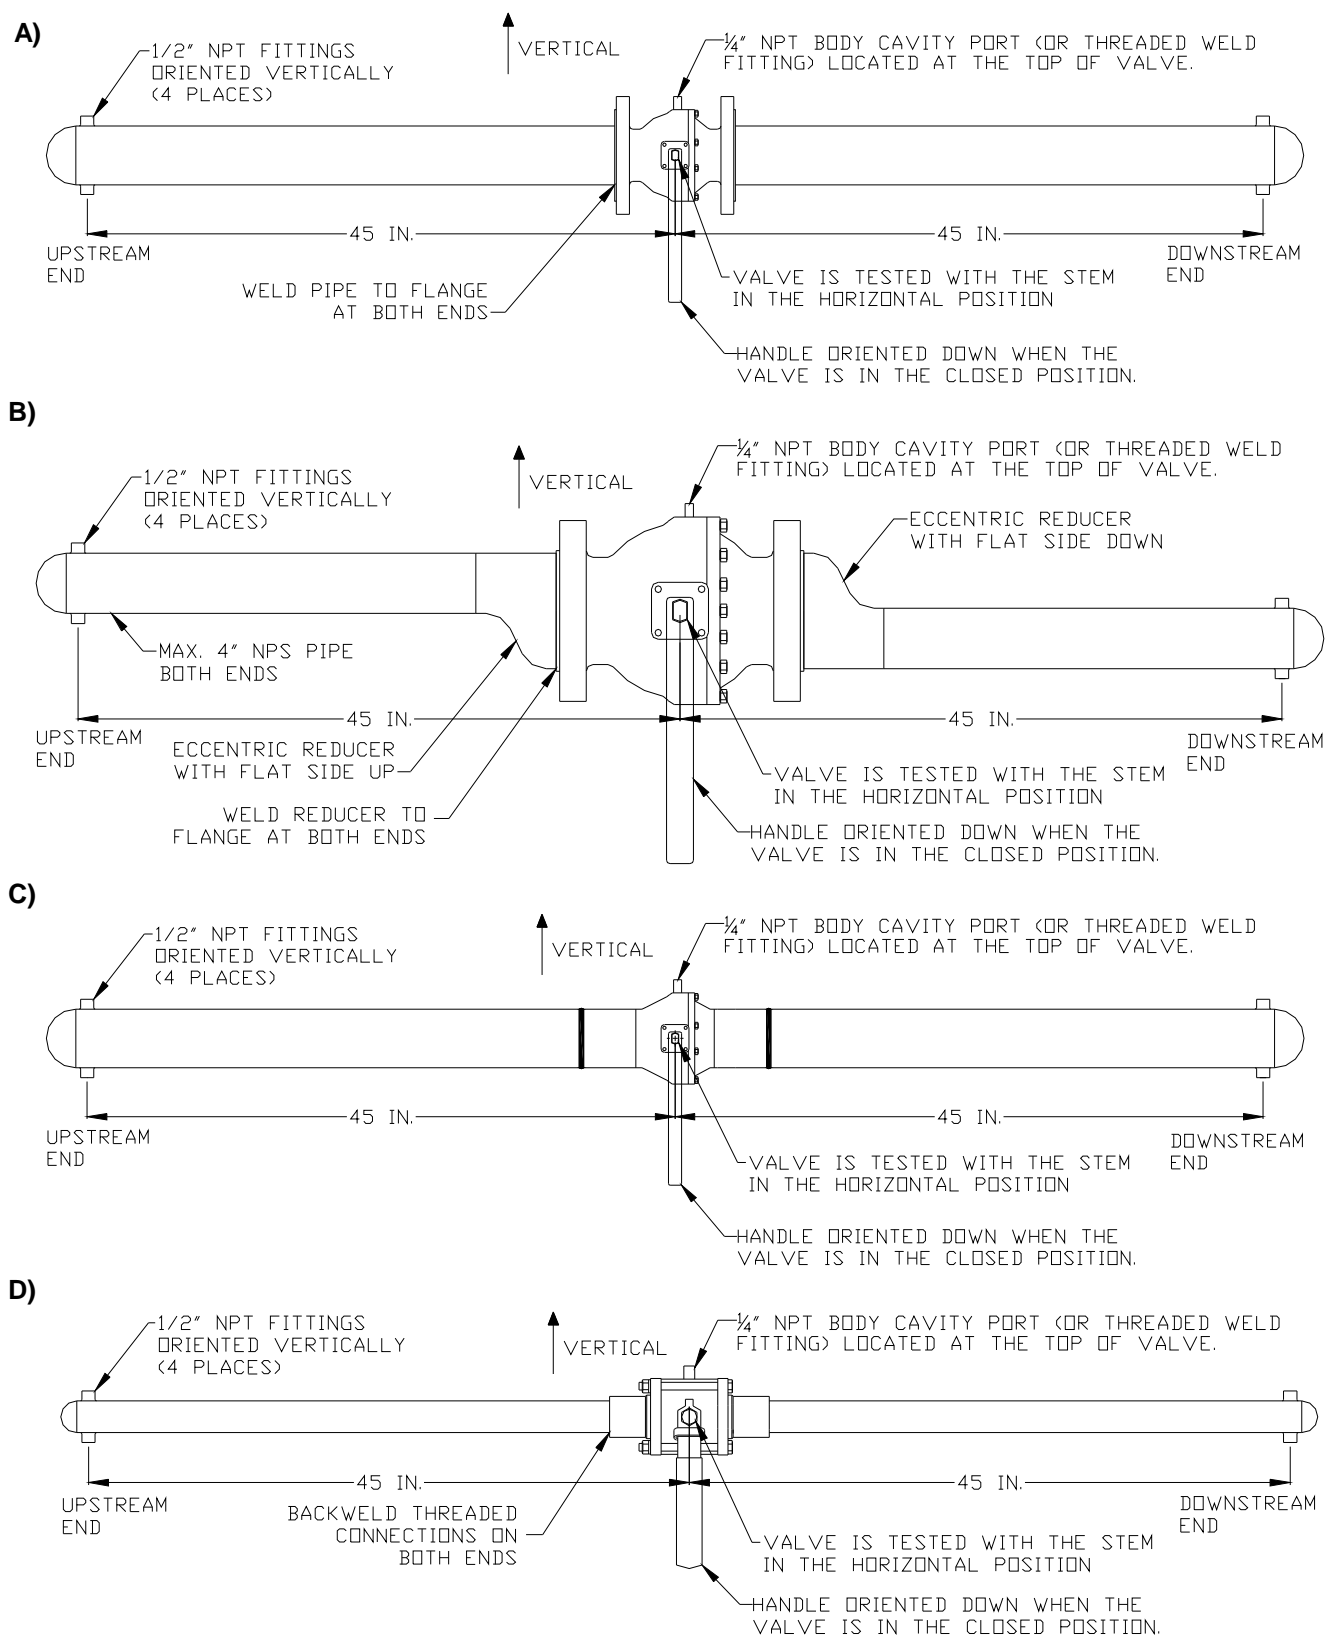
Various types of valves prepared for fire testing: (A) Flanged-4" NPS and smaller, (B) flanged-larger than 4" NPS, (C) buttweld or socketweld, and (D) threaded.
